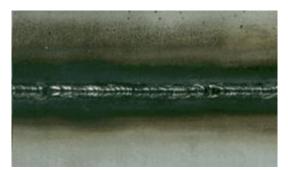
Unacceptable - Oxide layer present (grey colour), weld burned; lack of proper backpurging
